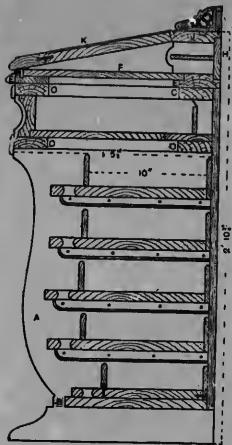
Vertical Section through Combined Cabinet and Writing Table.
